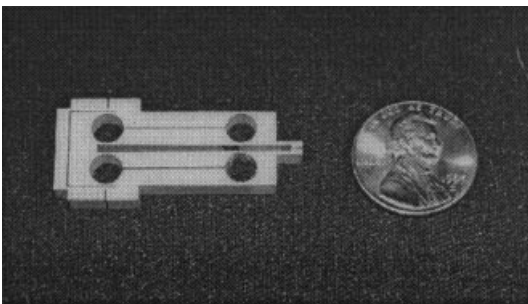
Small-scale robot gripper as an example of a compliant mechanism that incorporates conventional bending-beam flexure joints.
